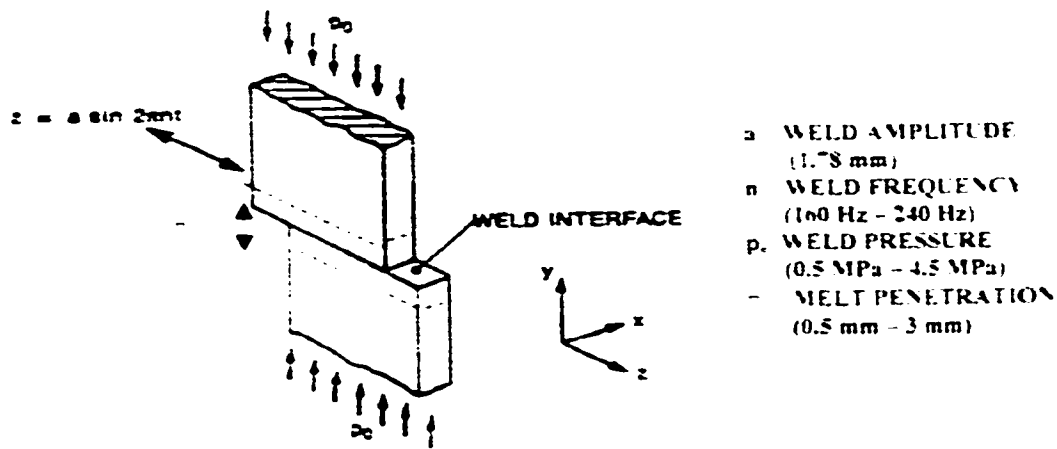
Schematic representations of part geometry and motion in vibration welding
